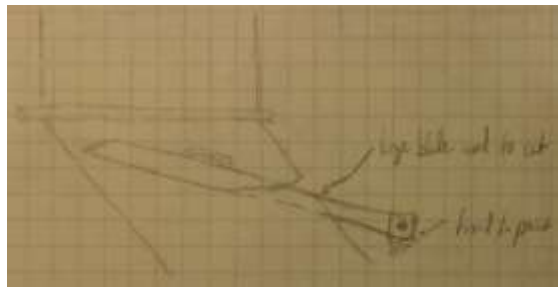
Cutting mechanism design concept utilizing an attached paper cutter blade.
